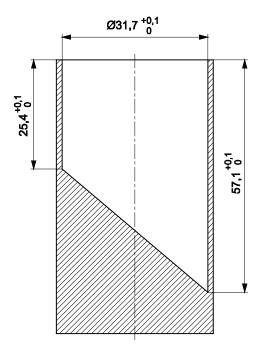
Small parts cylinder iTeh STANDARD PREVIEW
